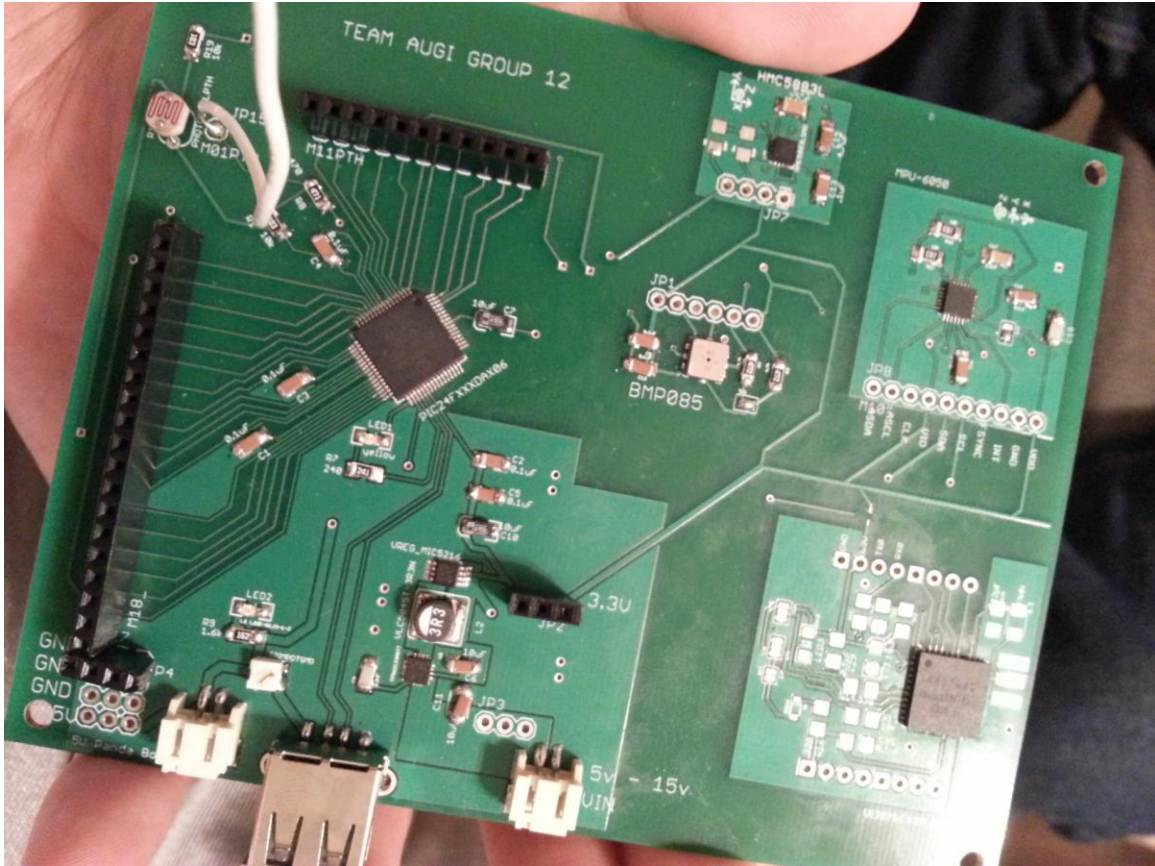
Finished Circuit Board. Manufactured from EAGLE design.
